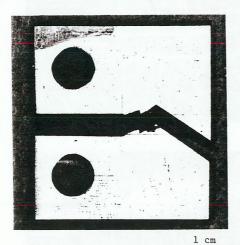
Photograph of specimen B, showing the stepped crystallographic fatigue crack region and the final cleavage failure.
